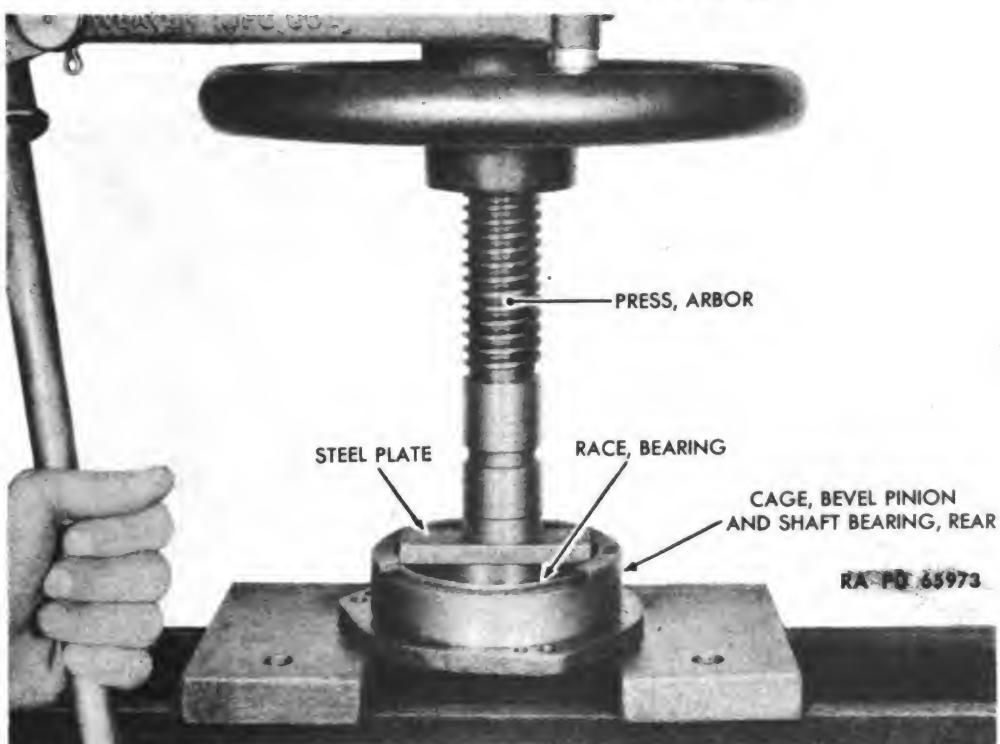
Pressing Bearing Race from Rear Bevel Pinion and Shaft Bearing Cage
